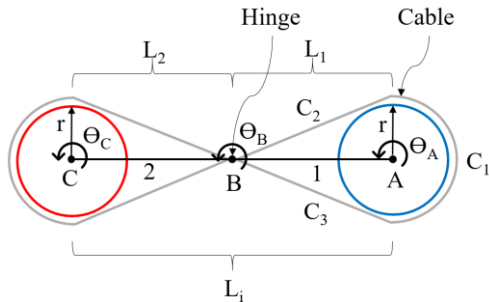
Modified cable and pulley mechanism with cable constrained at B.
